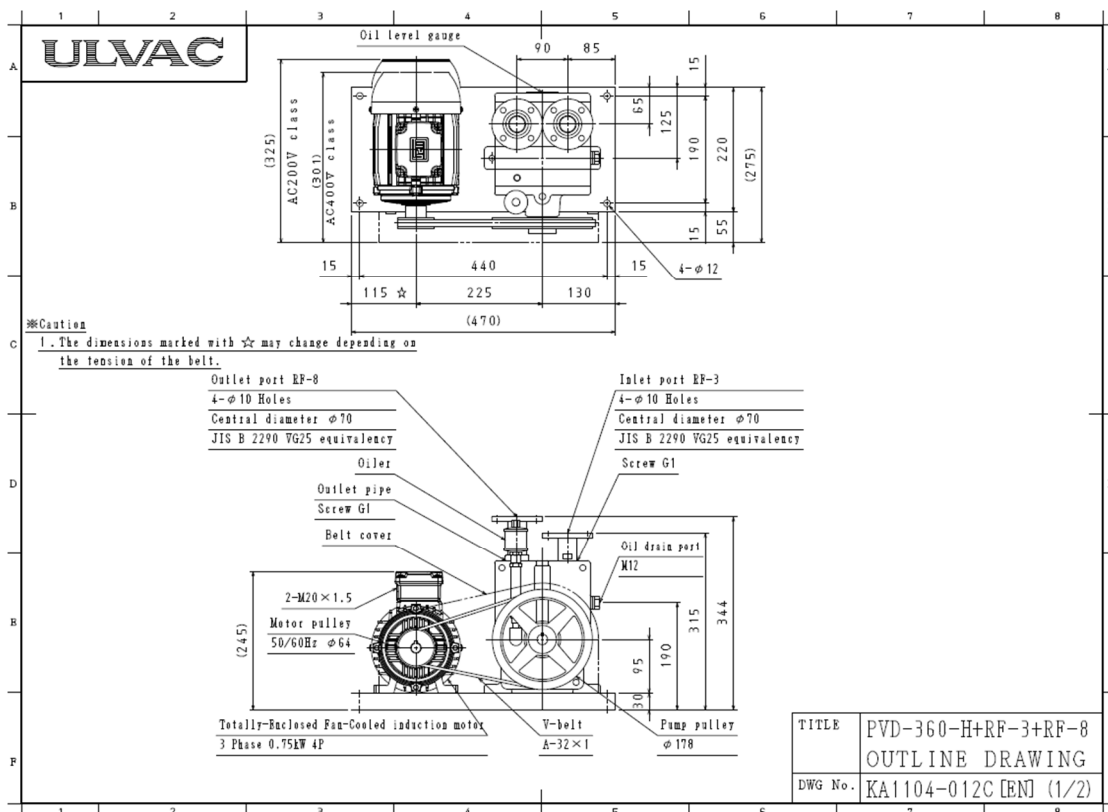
Dimensional drawing PVD-360-H+RF-3+RF-8
